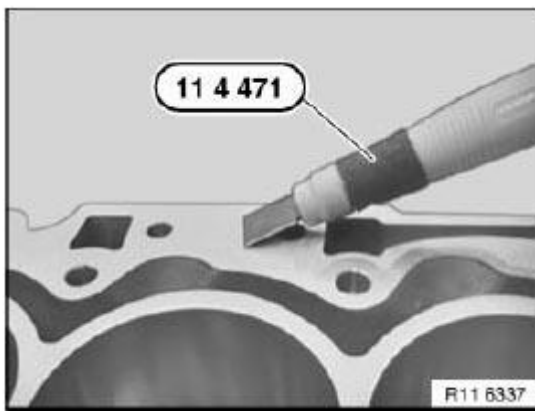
Removing Coarse Residues On Sealing Faces Using Special Tool (11 4 471) From Cylinder Head And Crankcase
